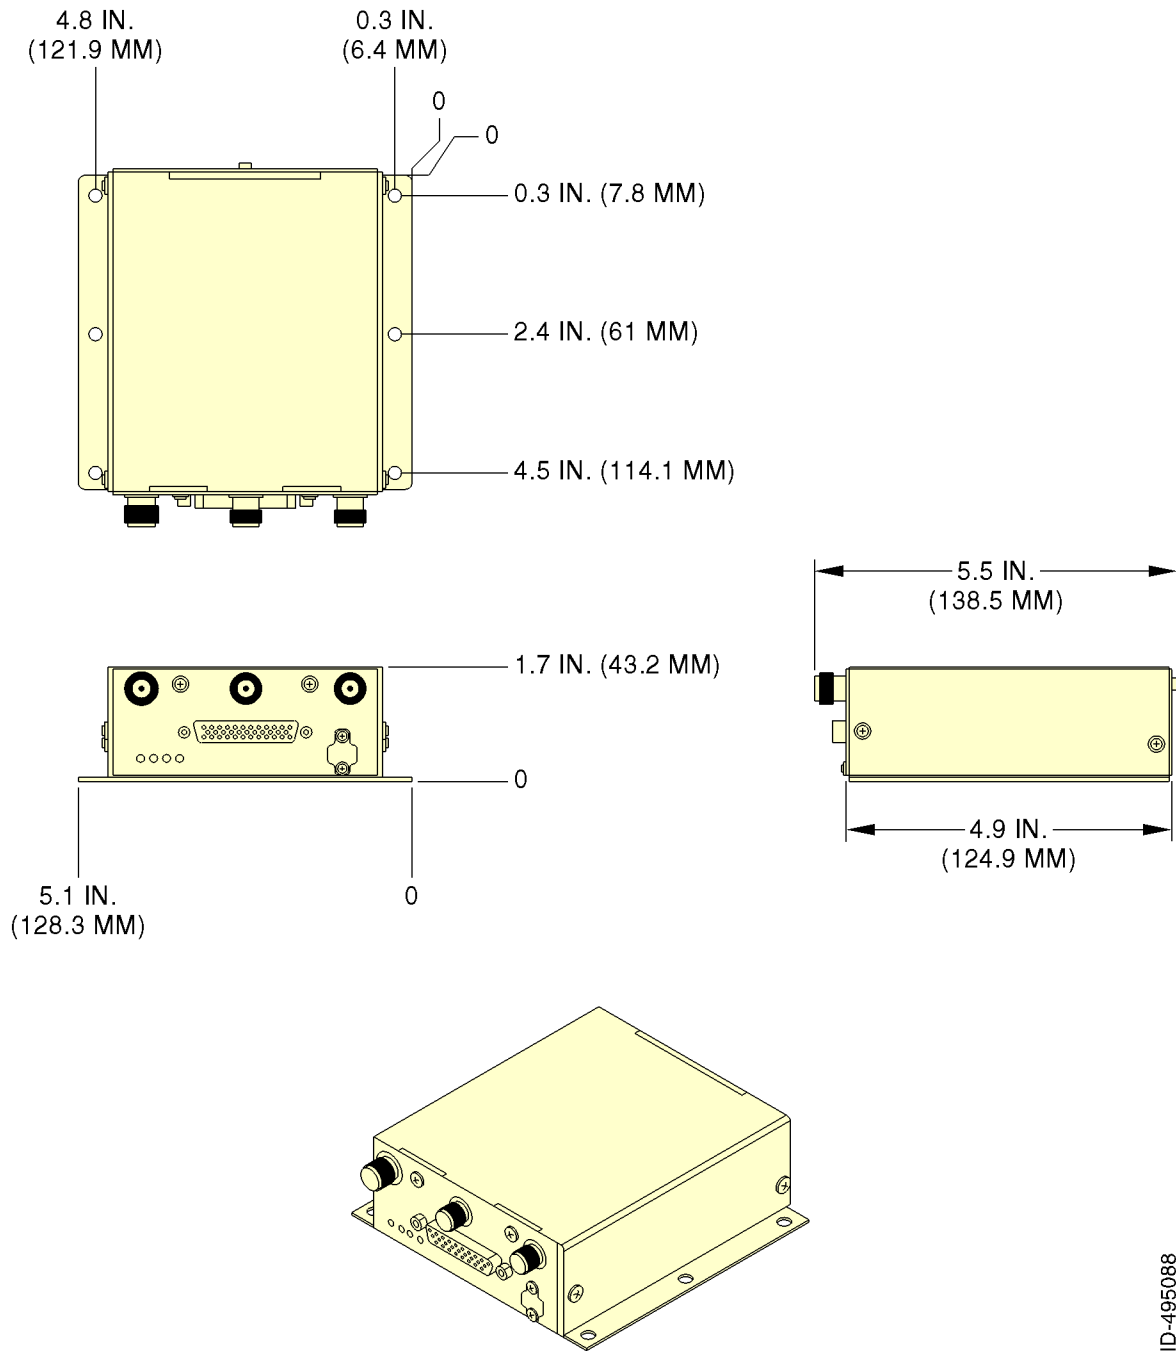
(Sheet 1 of 1) KGX Mounting Dimensions
